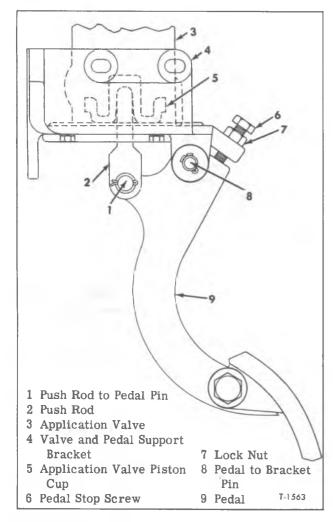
Brake Pedal and Linkage (Tilt Cab Models)
